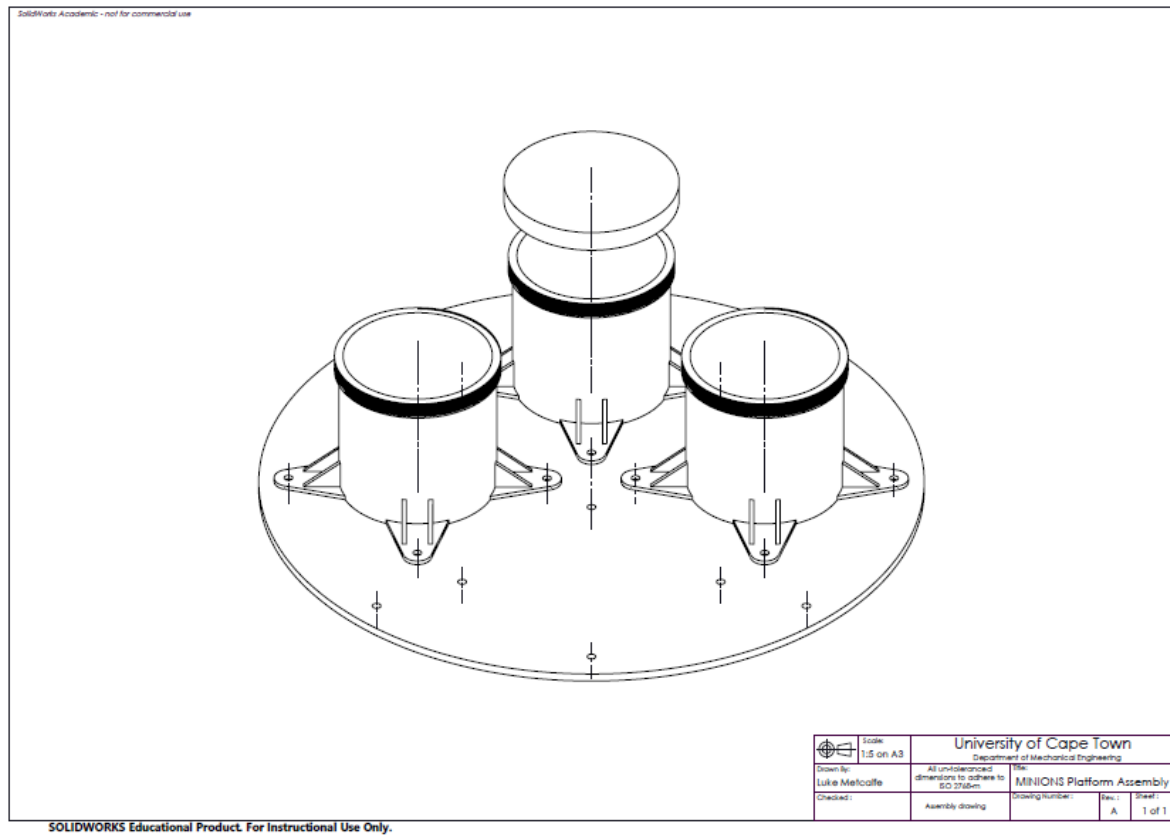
Isometric view of the assembly of the MINIONS mounting platform and three MINIONS enclosures
